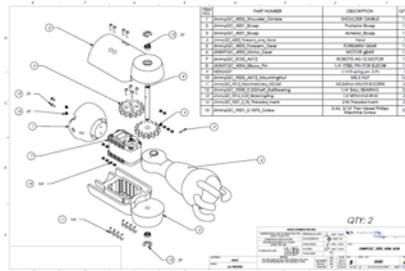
Mechanical drawing and parts list for JimmyQC’s arm; notice the mechanism that allows the elbow to move
